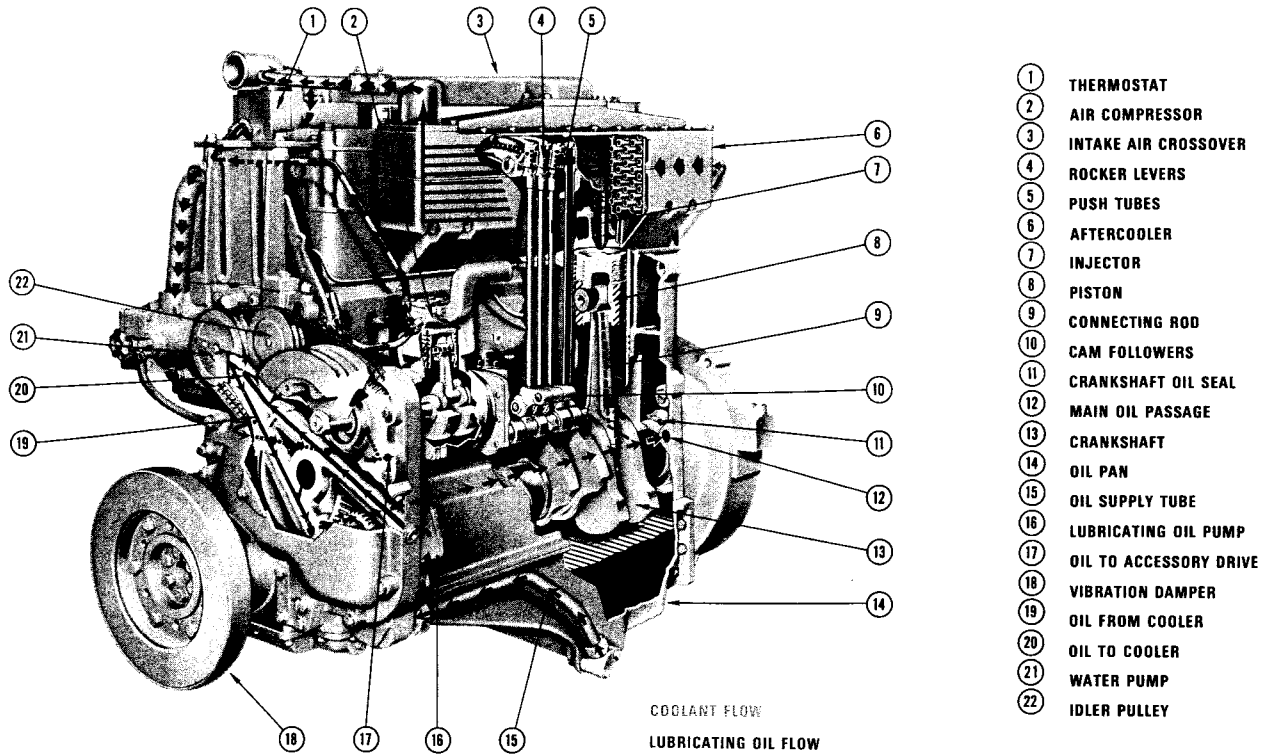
, (LWC-25). Lubricating oil and coolant flow - FFC (NTC Series)
